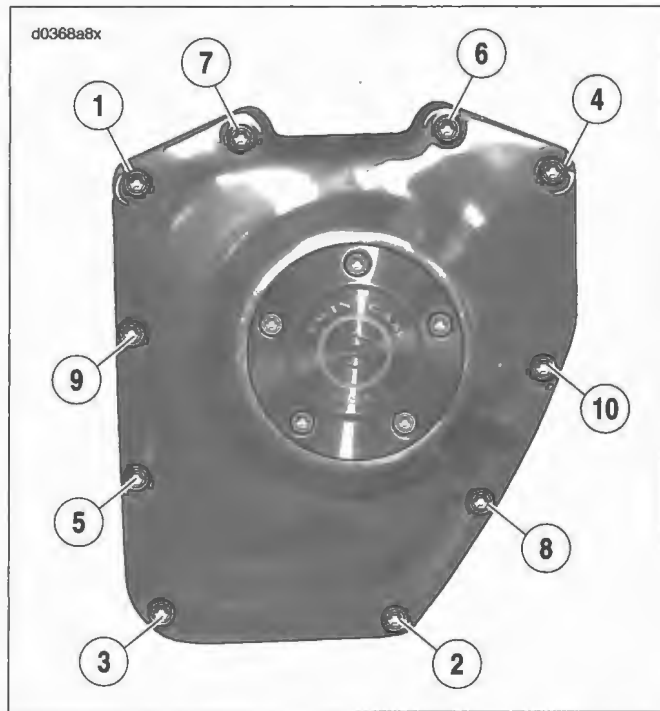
Cam Cover Installation: Alternately tighten cover screws to 125-155 in-lbs (14.1-17.5 Nm) in the sequence shown.
